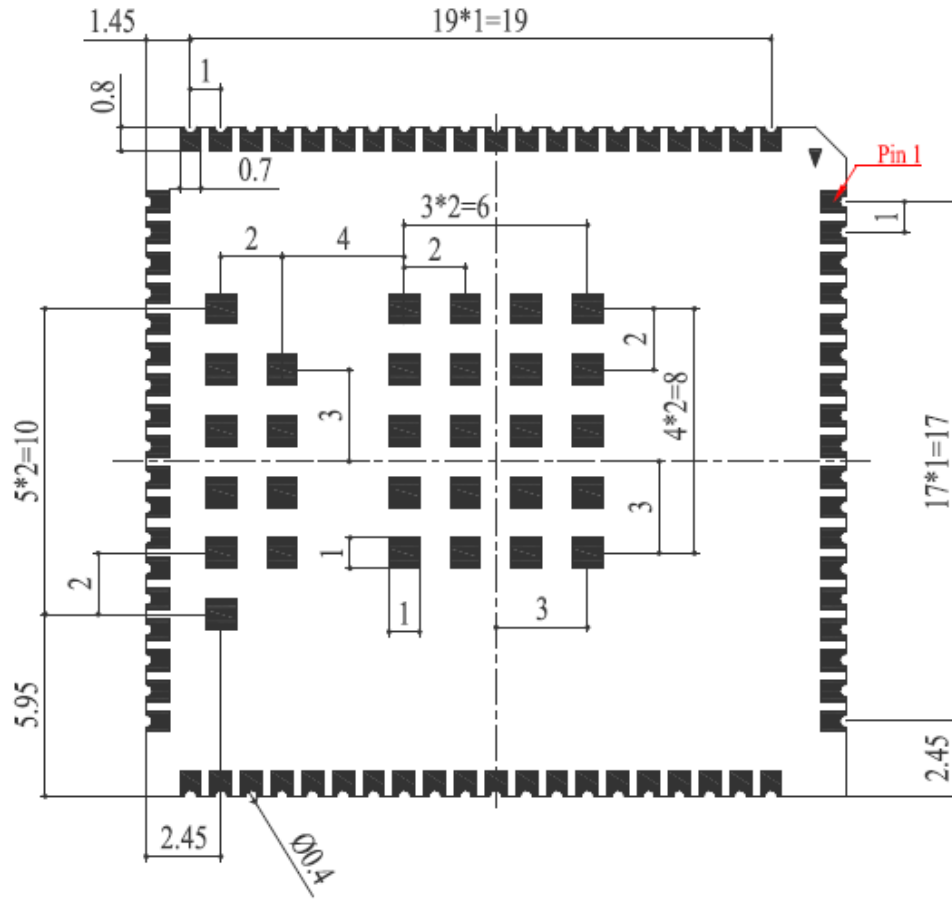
EC600M-EU Module Dimensions (Bottom View)
